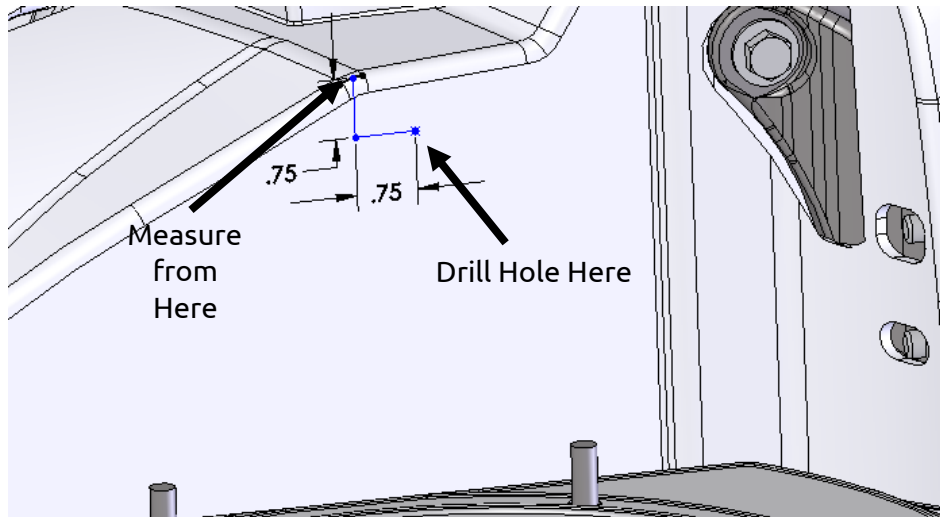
Hole to be Drilled for Wiring (Driver Side Shown)
